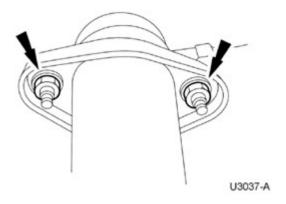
Locating Exhaust Manifold Flange Nuts Courtesy of FORD MOTOR CO.
